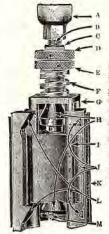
The Hall hone used as an example. Names of parts: A, ball joint driving socket; B, main-shaft; C, tension adjusting plate; D, upper flange nut and extending sleeve with left-hand thread for solid pressure; E, lower flange nut with right-hand thread for spring pressure; F, main spring; G, pressure flange; H, upper and lower cones, part of main-shaft, supporting stone carriers; I, body; J, stone retaining screws; K, honing stones in stone carriers; L, taper bearing pads on stone carrier arms that swing in and bear on taper cones H; M, lock nut and protection flange.
